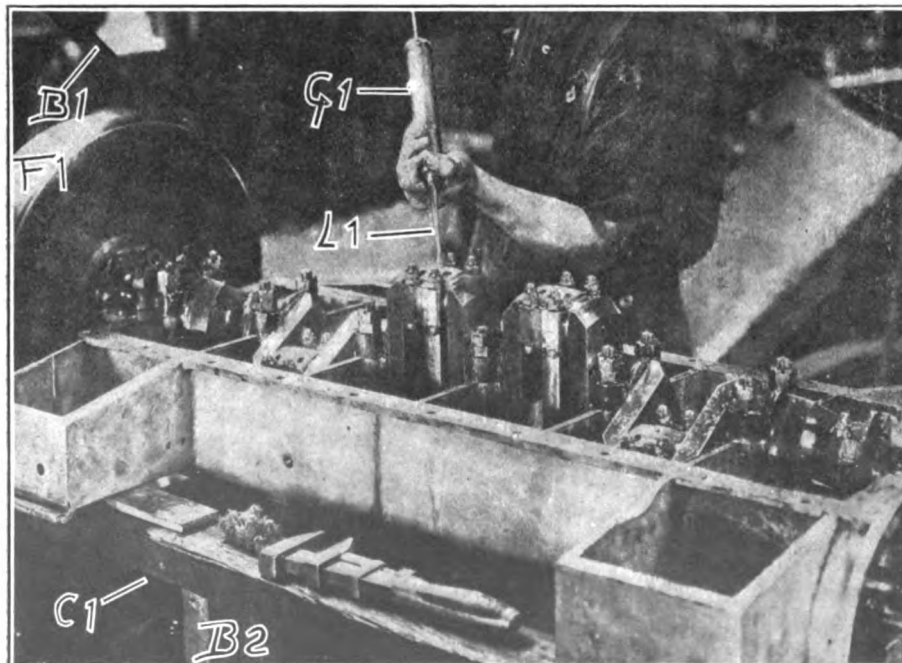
Running engine inverted from machine shaft with belt after scraping bearings and lapping cylinders
